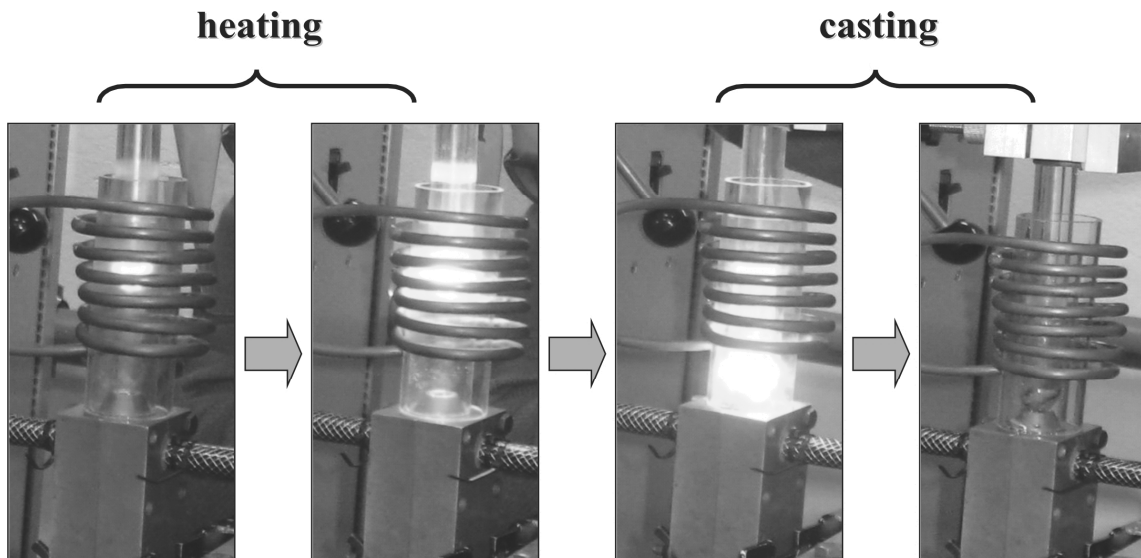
Chosen stages of the pressure die casting method used for bulk amorphous samples casting
